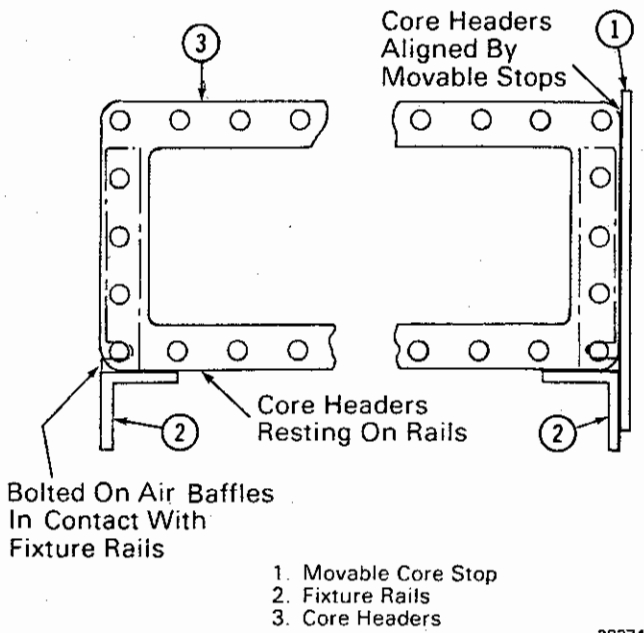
Old Style Single Length Core Alignment On Assembly Fixture
